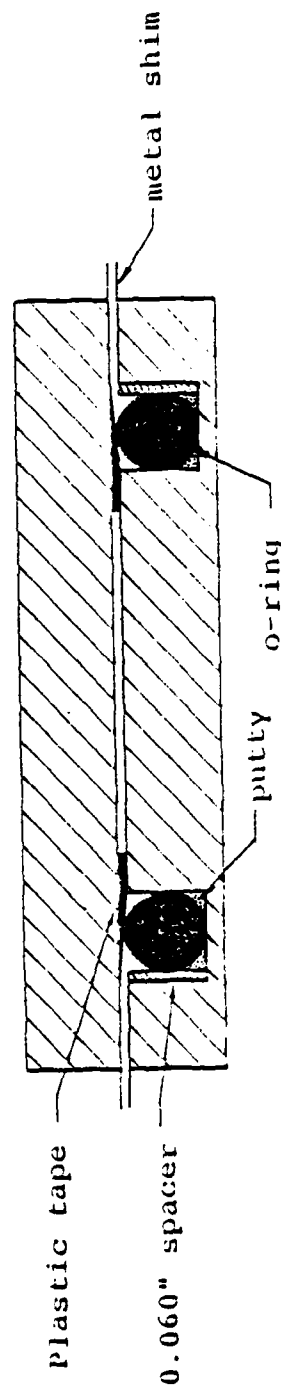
Schematic of channel cross-section illustrating fillers used to pack the O-ring groove.
